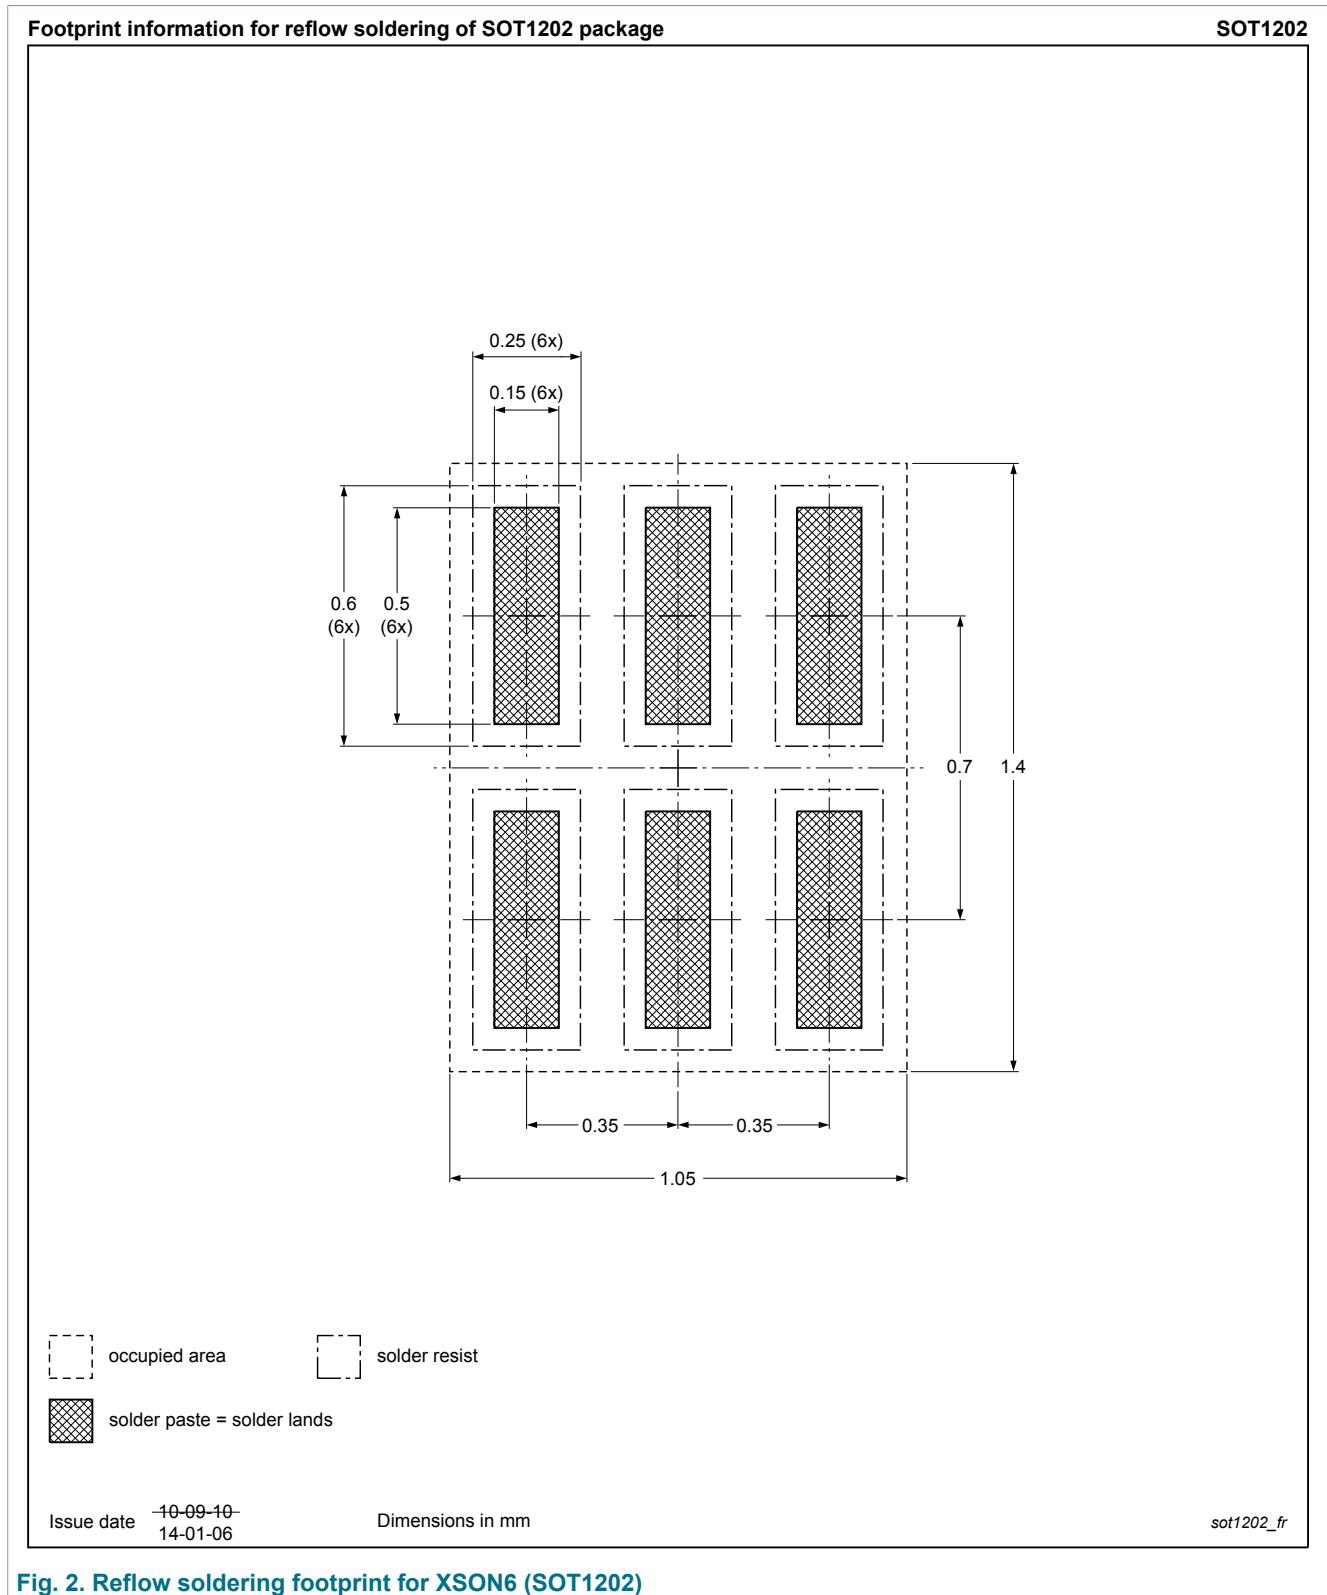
Reflow soldering footprint for XSON6 (SOT1202)
